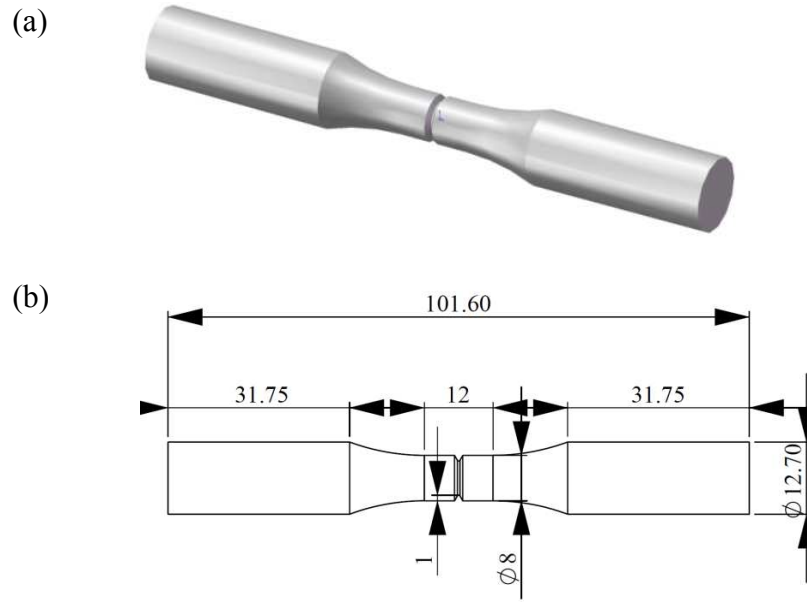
Fatigue specimen: (a) notched specimen and (b) dimensions of notched specimen. (All dimension in mm).
